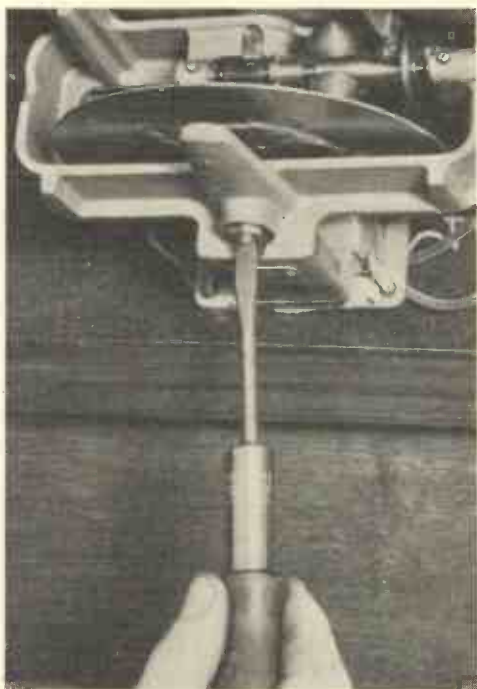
ADJUSTMENT OF LOWER MOTOR BEARING.
